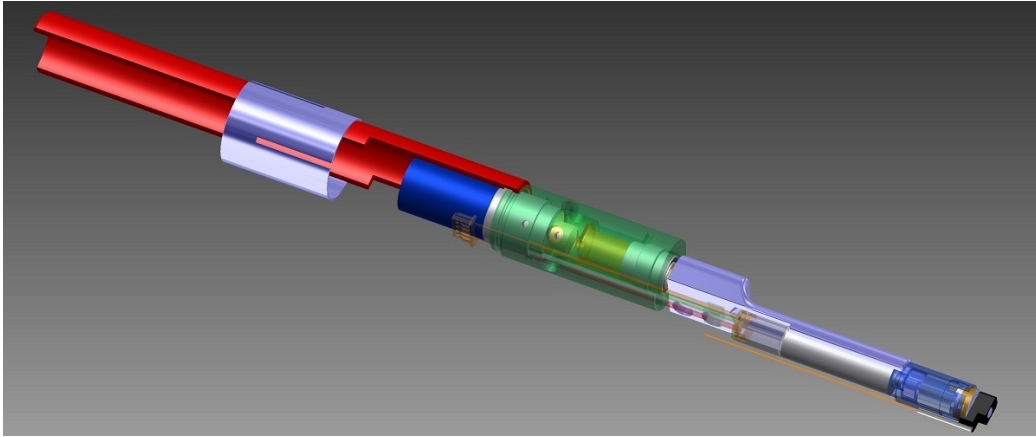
Current 3D Design of the positioner in an oblique viewing angle.
